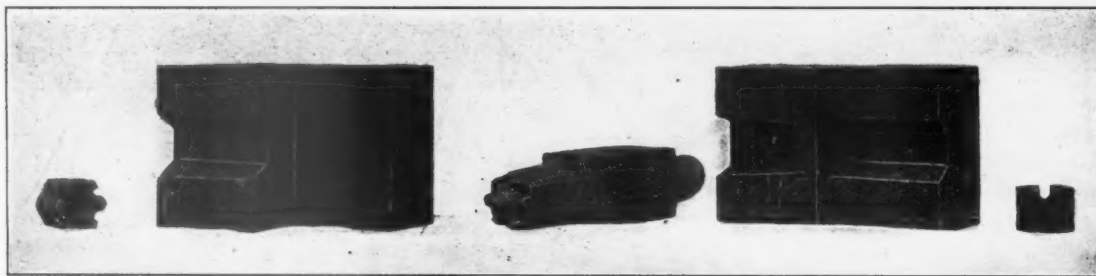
DIES AND HEADER FOR MAKING BRILL NUTS.
